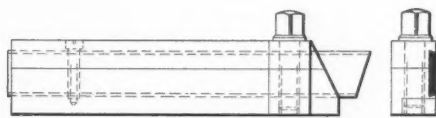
Billings & Spencer Cutting-off Tool-holder.
